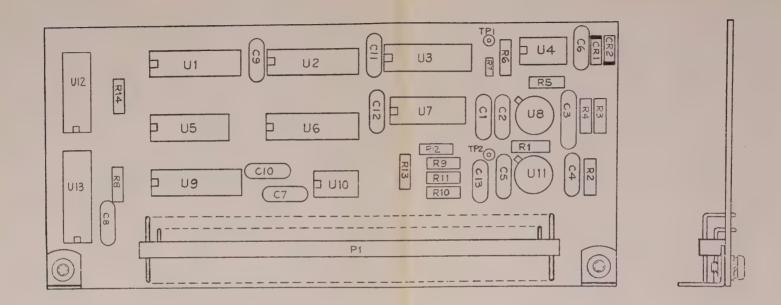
MODEL 6244A A5, N COMPUTER PC ASSEMBLY #05757301 Rev D
